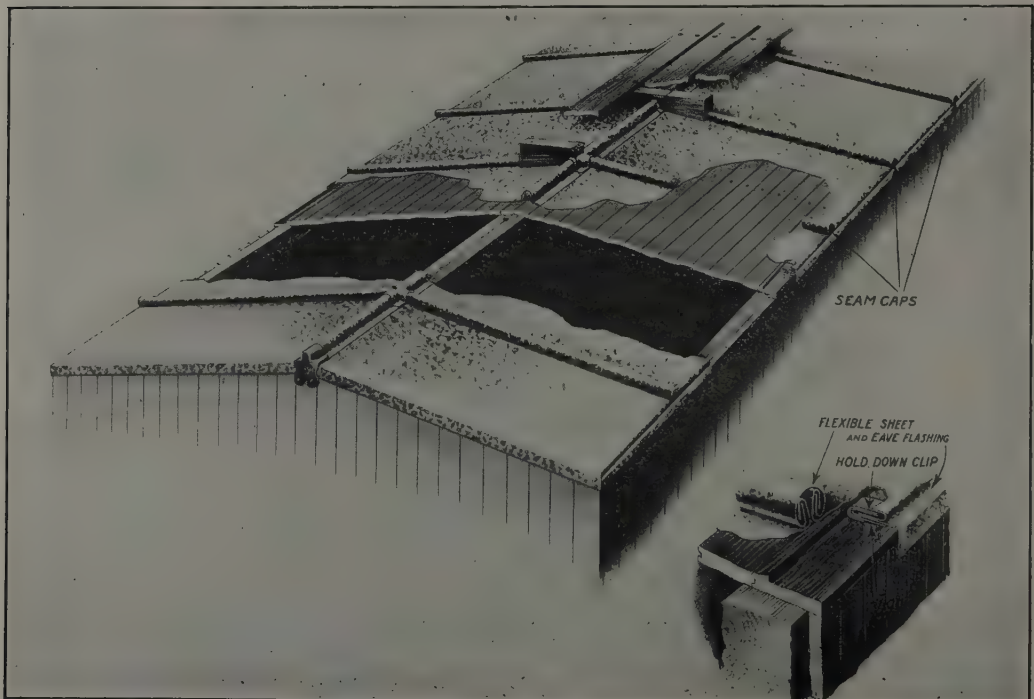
Flexible Outside Metal Roof. Chicago-Cleveland Car Roofing Company.
